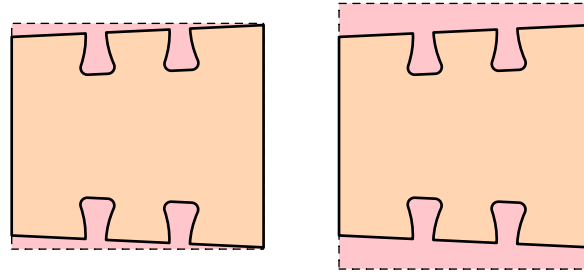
Pre-cutting the offcuts to reduce milling times. The material to be milled is highlighted in red. Left: Pre-cut offcut. Right: Original offcut.
